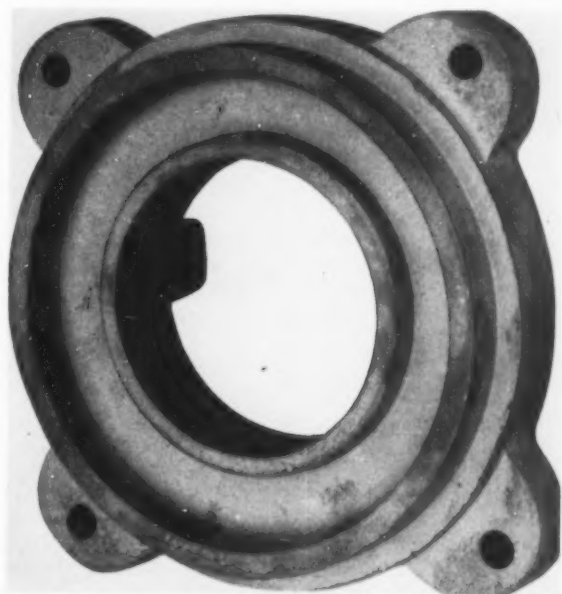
Working with regular gray iron, progress is being made on this part to eliminate all machining except for the tapping of four holes in outer lugs.
